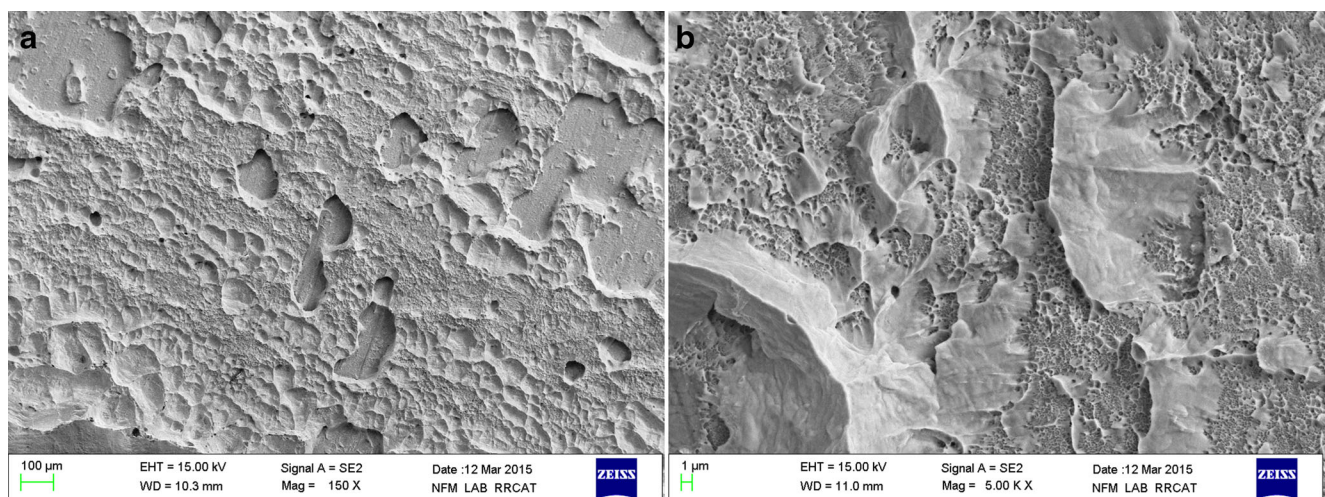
Fracture surface of tensile tested “ultrasonically cleaned” 316L stainless steel and OFE Cu brazed specimen. a Coarse dimples and relatively flatter regions, b magnified view of flat regions showing significantly finer dimples
